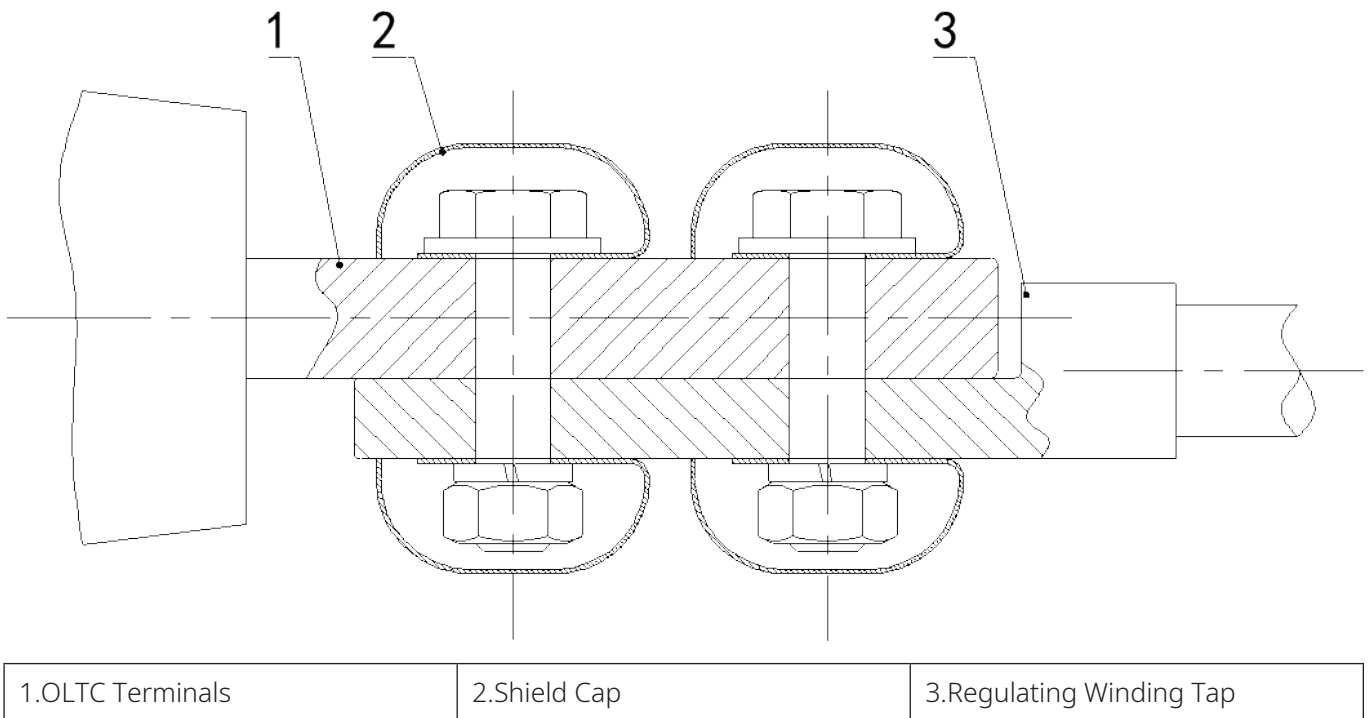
Cross-Sectional View of Regulating Winding Tap Connection to OLTC Terminal
